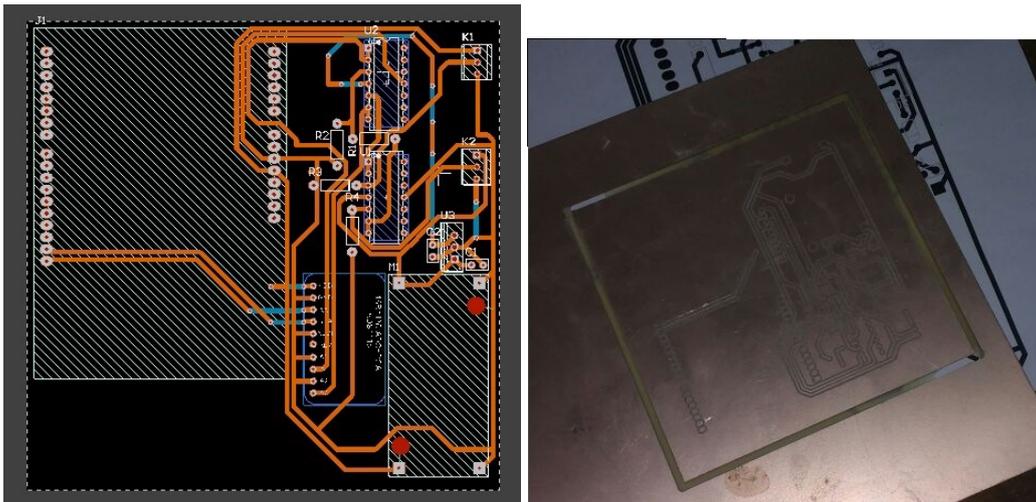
a.Printed circuit board design b. Machined printed circuit board. Source: Author
